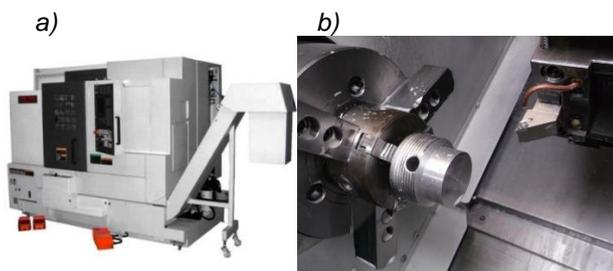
Position NL2000SY for cutting tests (a), view of machining system: handle - workpiece (piston) - tool (b)
